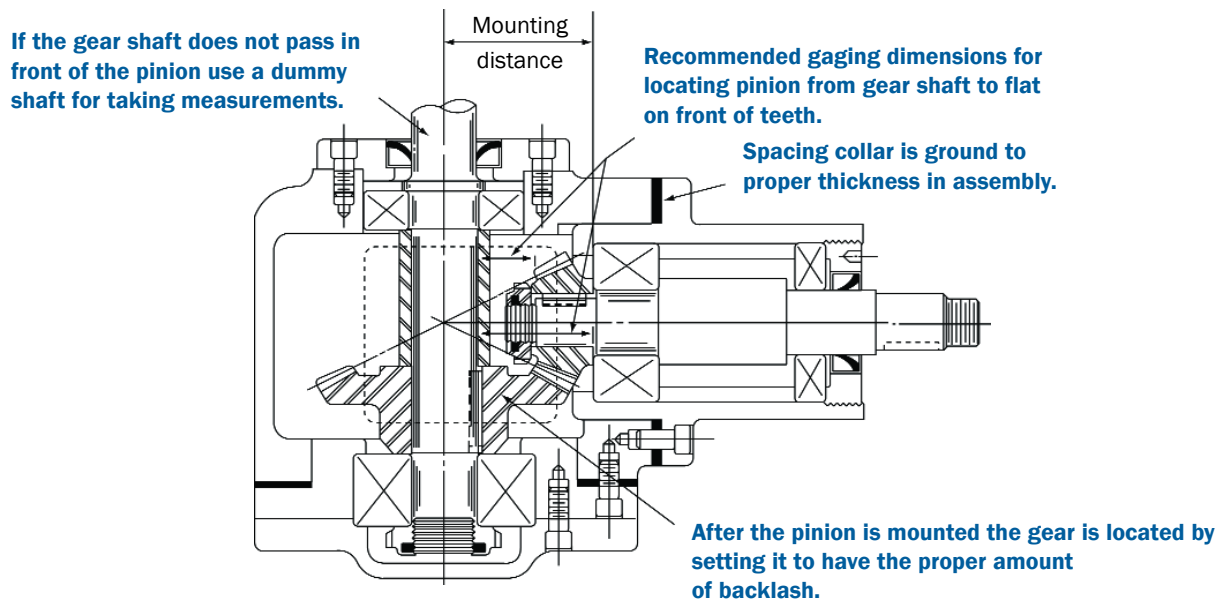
Measuring or gaging as shown is the recommended method for locating the pinion. Pinion should be set to mounting distance marked on pinion, and gear should be adjusted to give correct backlash.
